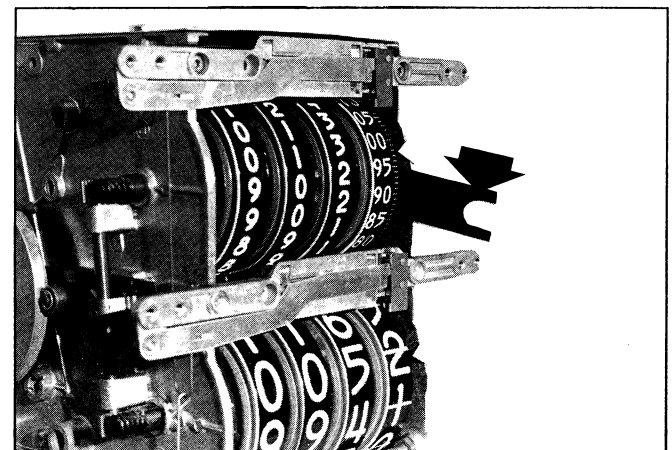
0.022 inch (0.56 mm) feeler gauge in right side of wheel bank.
